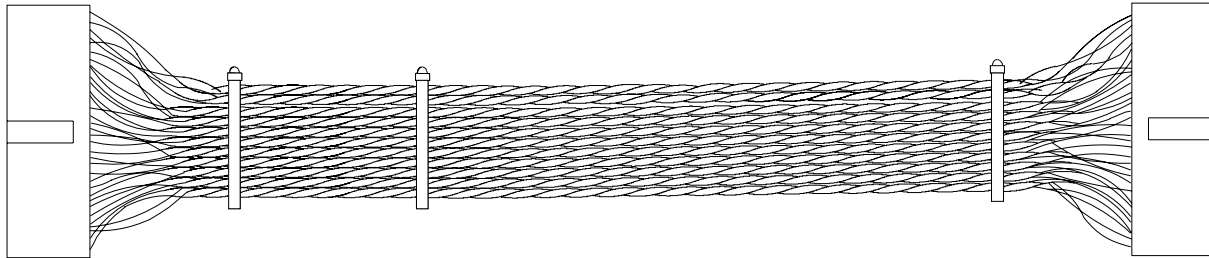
Gobo (MCB to Interconnect) Cable Assembly
